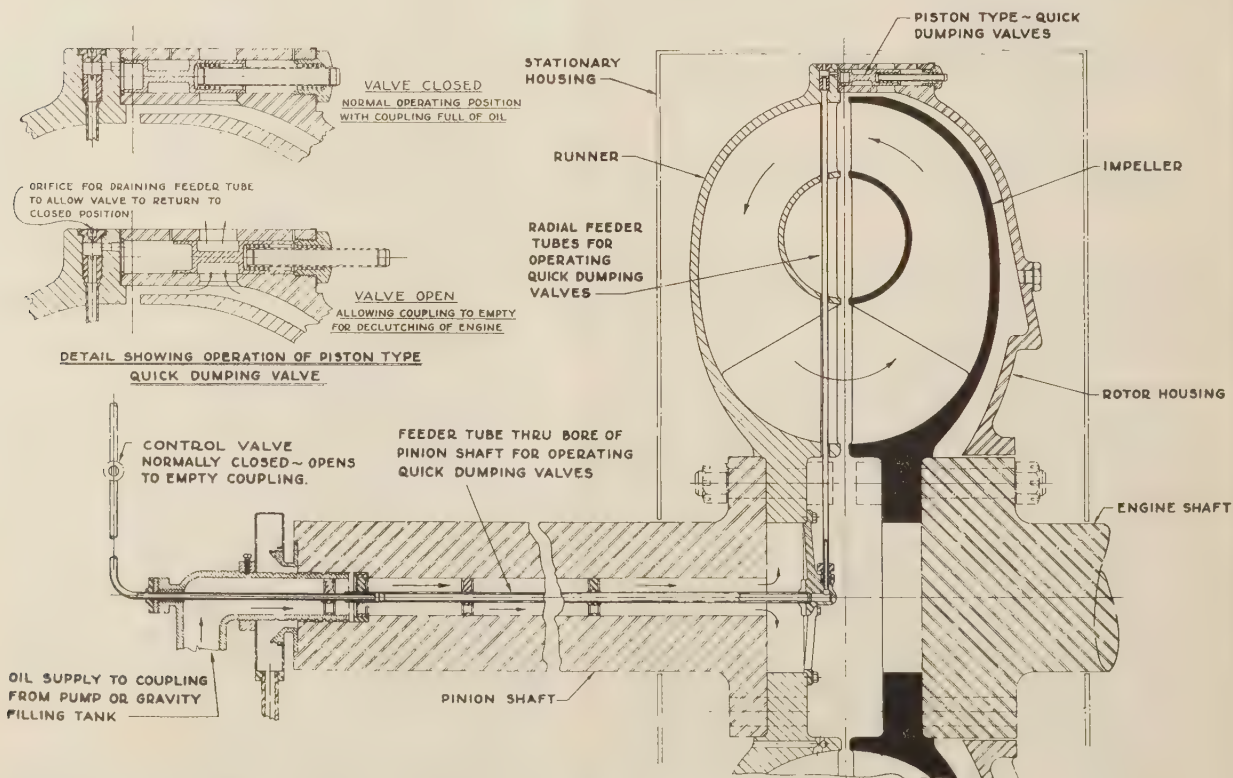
HYDRAULIC COUPLING WITH PISTON-TYPE QUICK-EMPTYING VALVES
